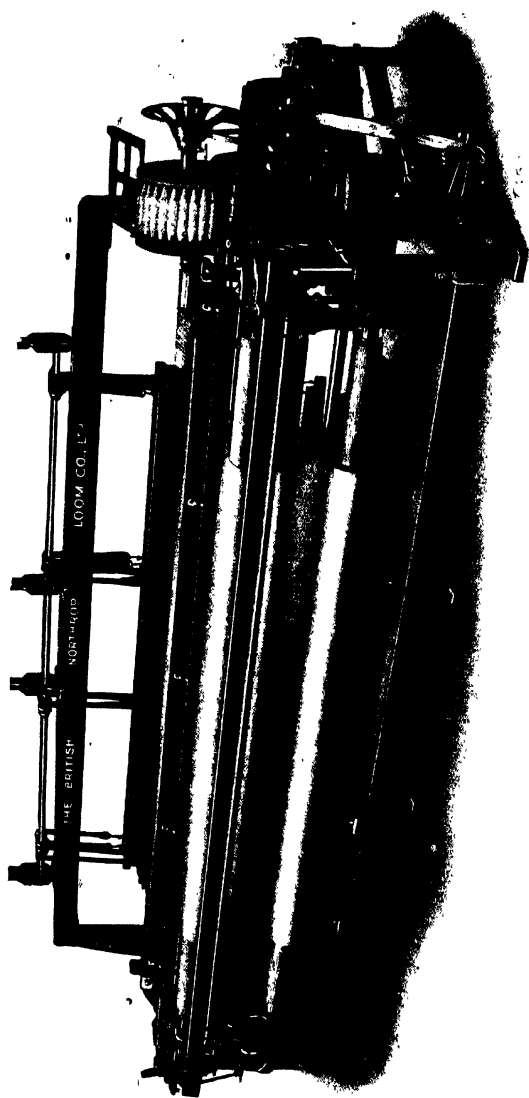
Northrop Heavy-Weight Sheet Loom.
